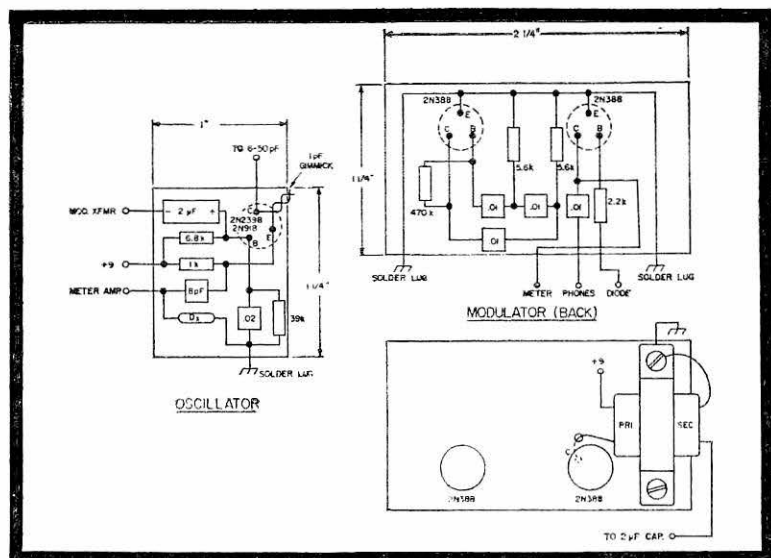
Layout of the two circuit boards used in the great dipper. Although two boards were used in this case, the circuit could be easily adapted to one board, and even to printed circuitry.
